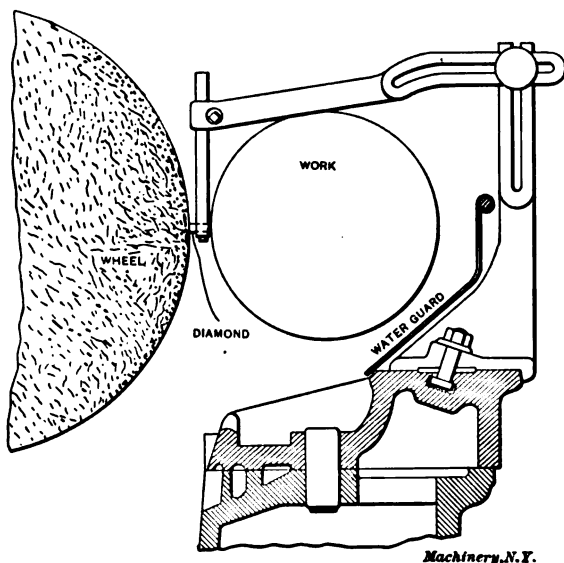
Fixture for Truing Emery Wheel with Diamond.
